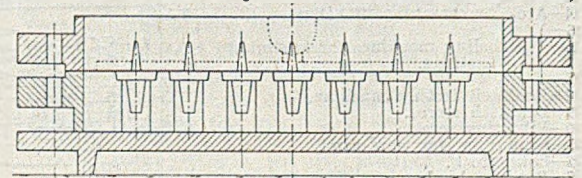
Section through a Mould Assembled on the Chill Plate ready for Pouring.
